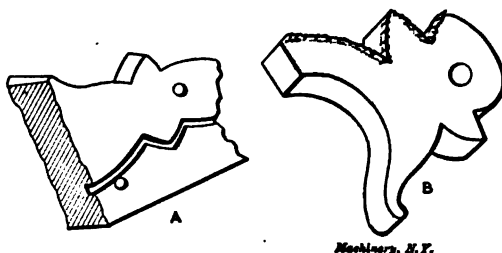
Arrangement of Fixture or Vise Jaw to Accommodate Burr.
